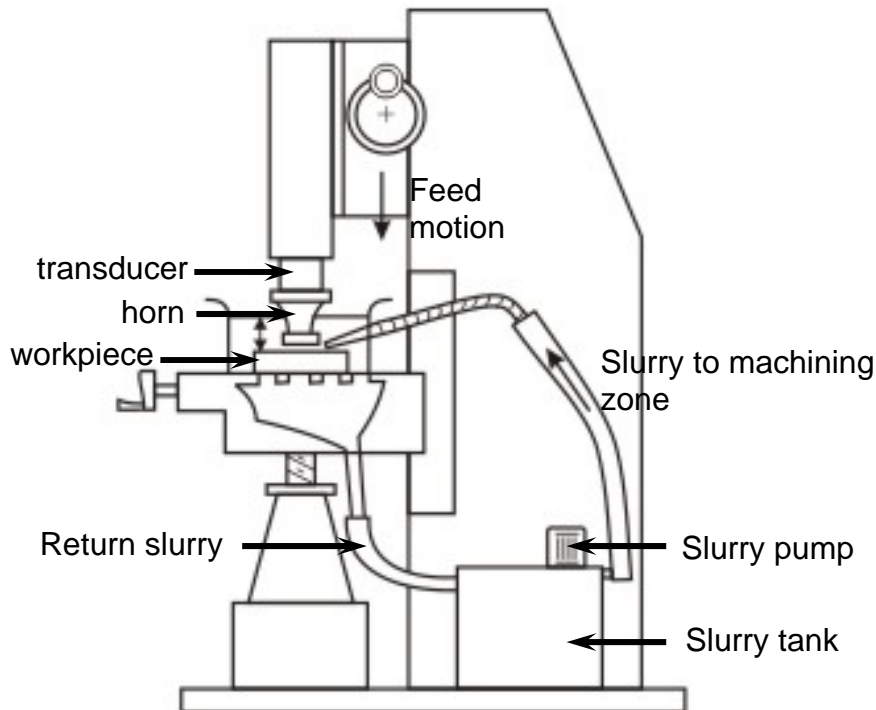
Schematic view of an Ultrasonic Machine
